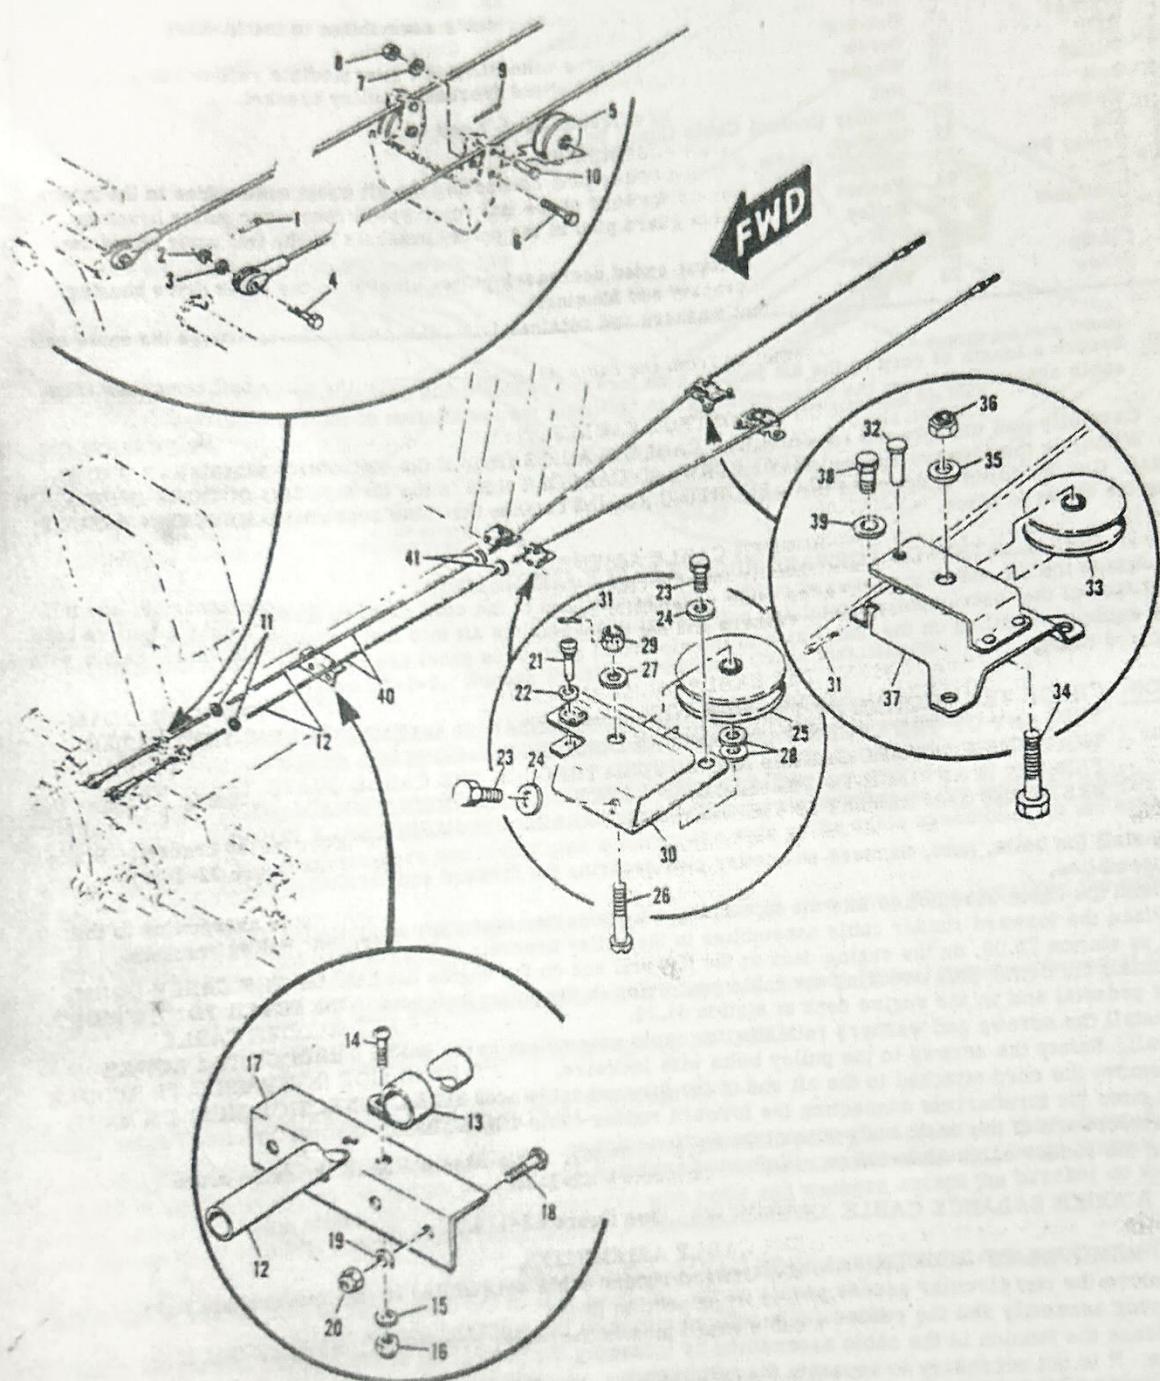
Forward Rudder Cable Assembly Installation
